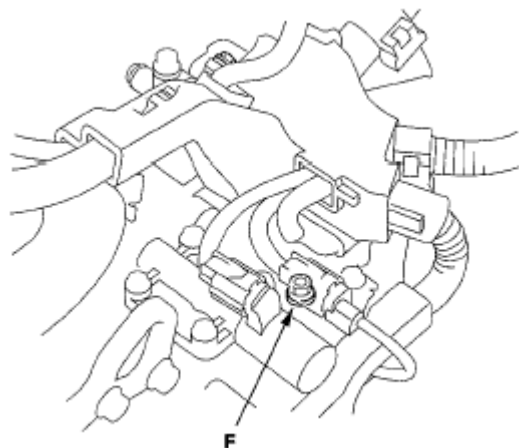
Identifying 4th Clutch Pressure Inspection Port
